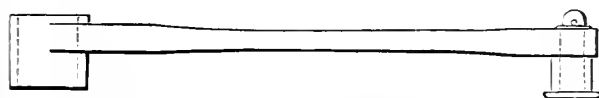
SIDE VIEW OF CONNECTING ROD.
